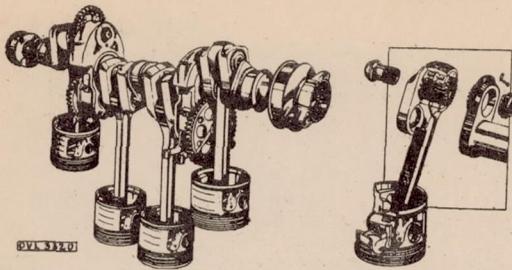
Built-up crankshaft of Hirth H.M.60 engine.
